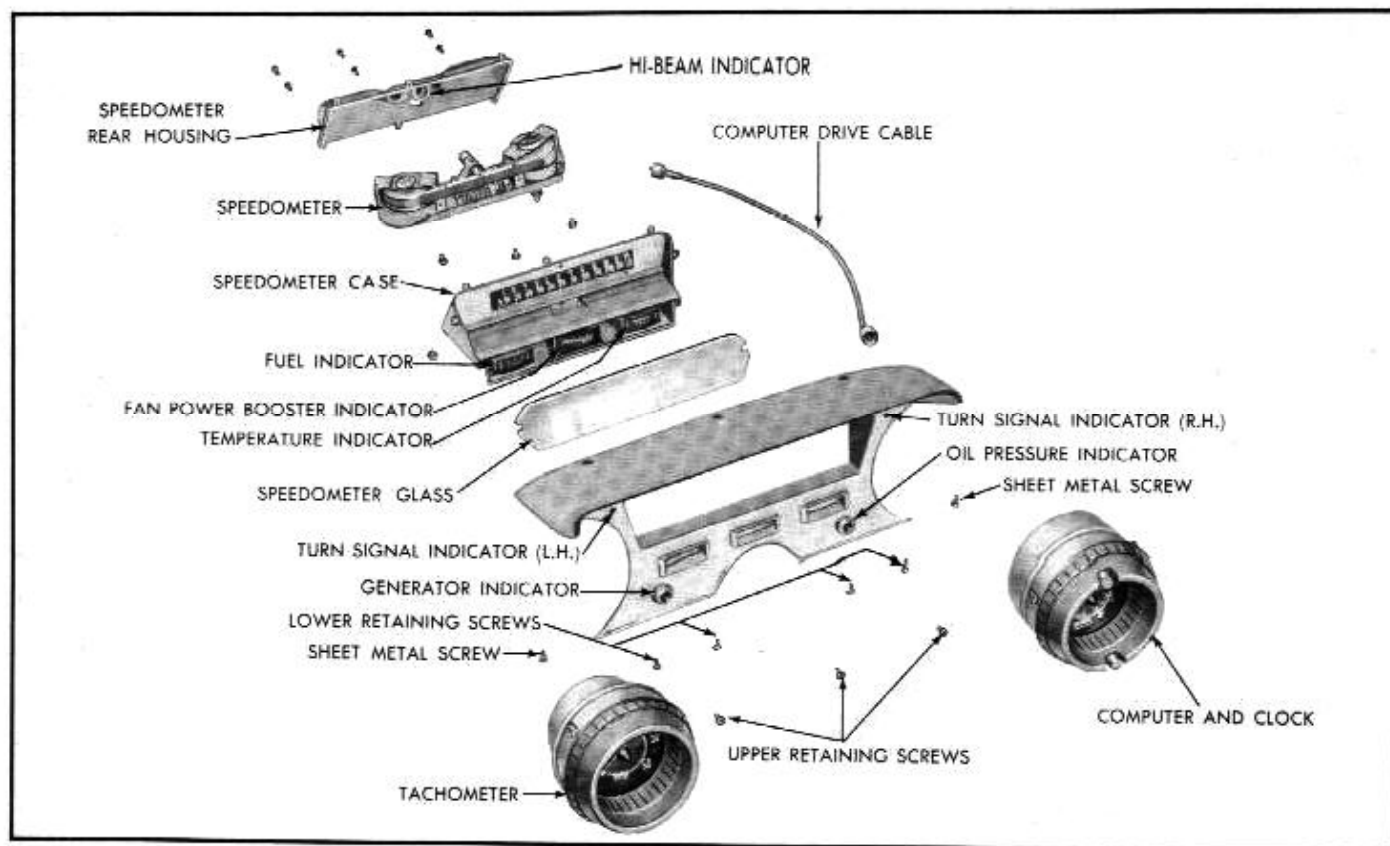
Speedometer and Instrument Cluster—Turnpike Cruiser
